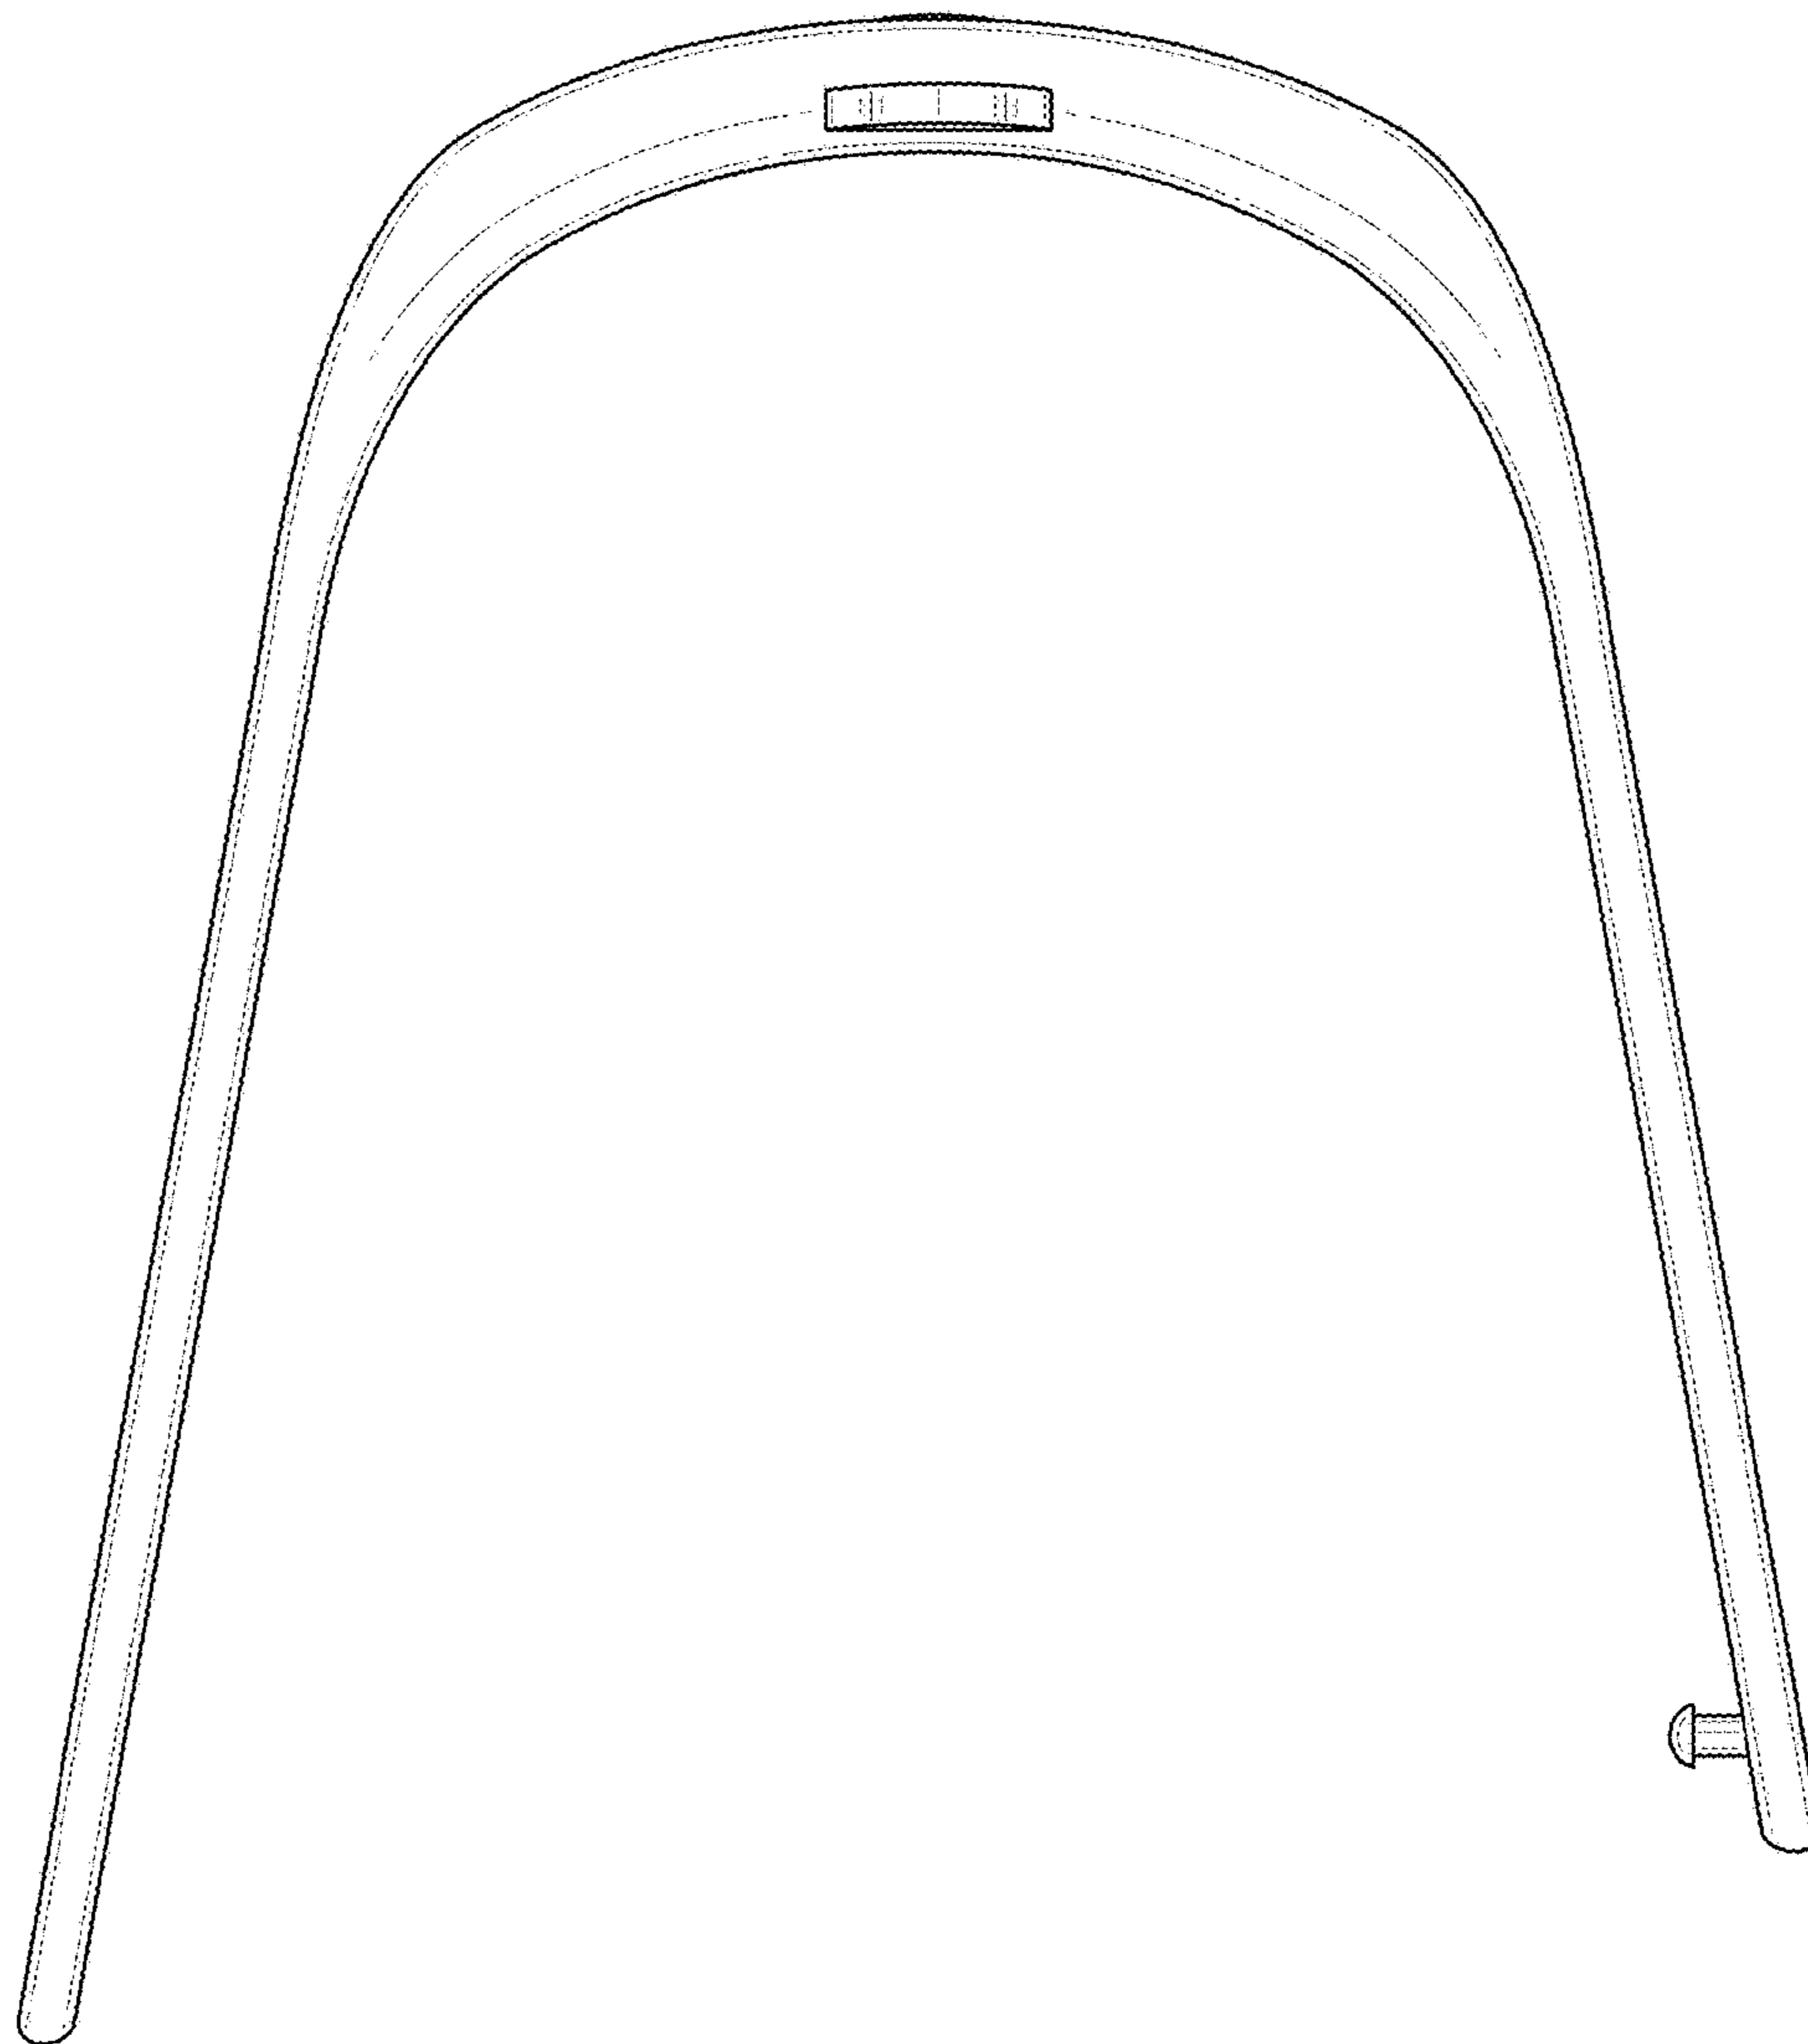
is a bottom view of a fourth embodiment of a wearable device.
